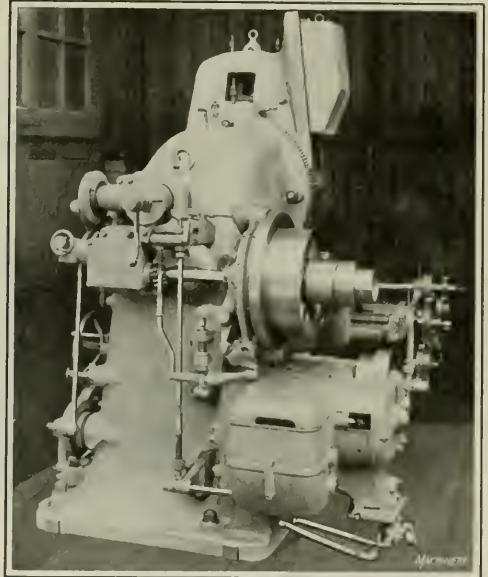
Rear View of the Maag Gear Generating Machine illustrated in Fig. 7
